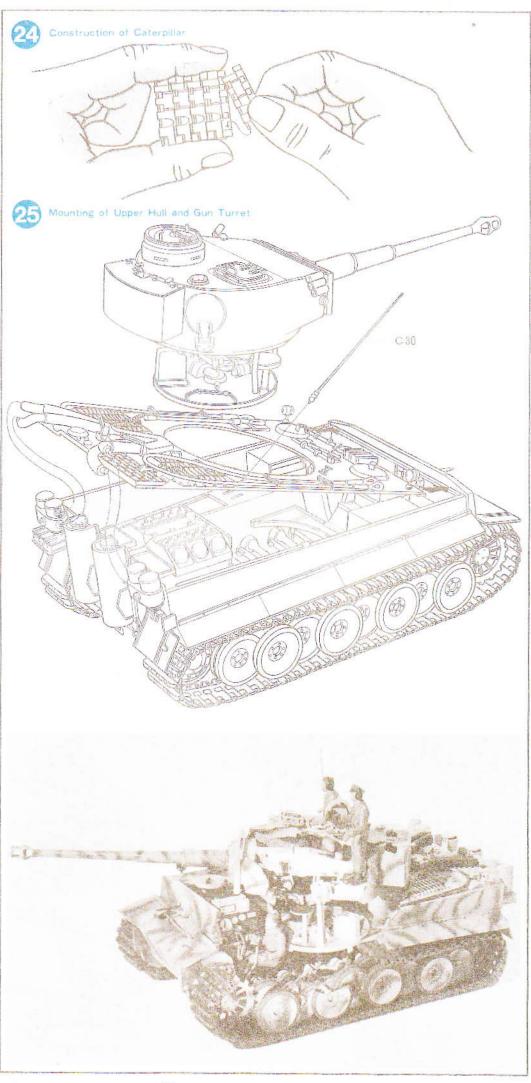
Mounting of Upper Hull and Gun Turret
